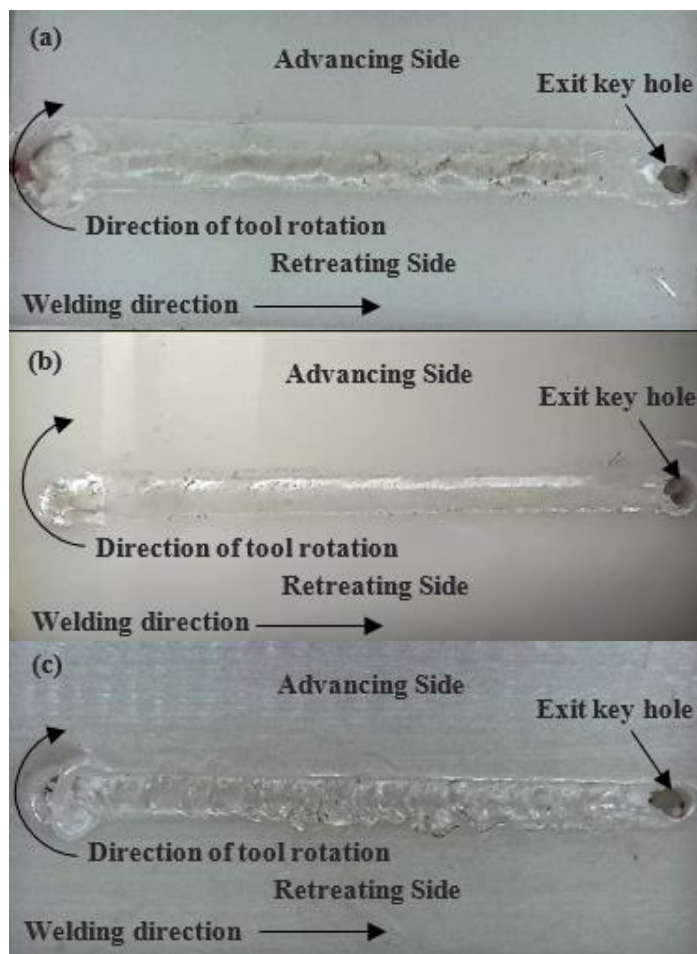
Welding results of feed rate variations (a) 9 mm/min (b) 12 mm/min (c) 16 mm/min.
